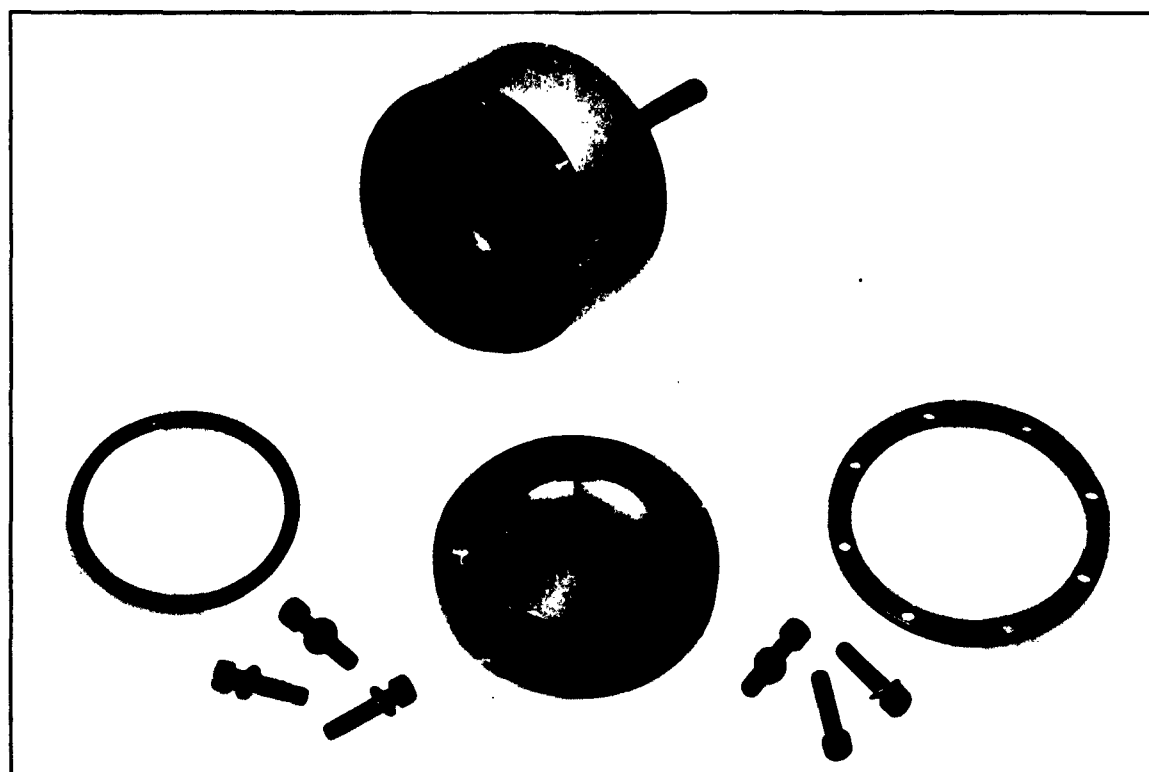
EXPLODED VIEW OF WILLS RING SEAL.
